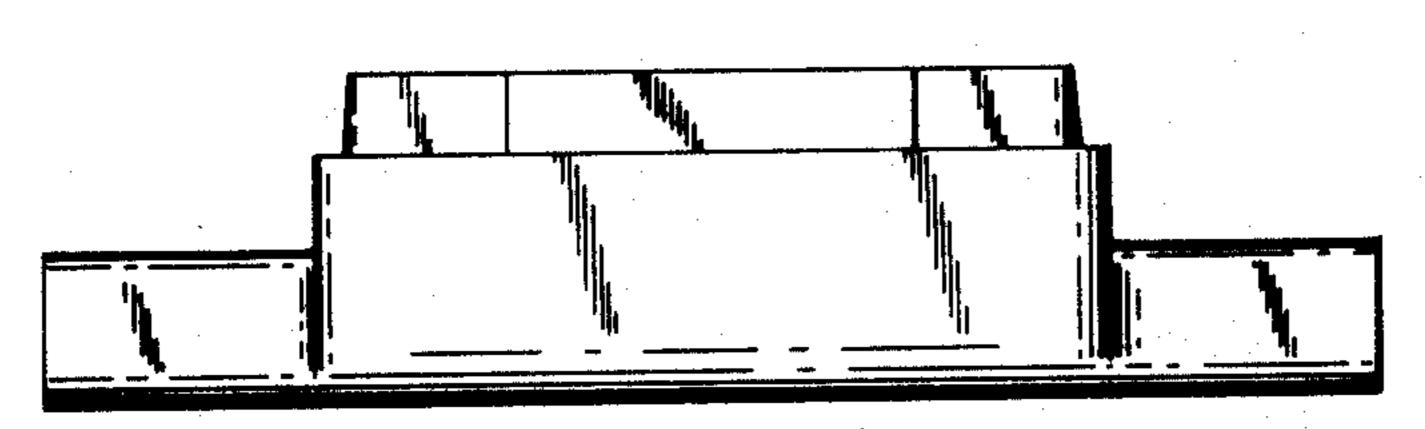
is a top view thereof on an enlarged scale; FIG. 3 is a side elevation view thereof on an enlarged scale, the opposite side having the same appearance; FIG. 4 is a bottom view thereof on an enlarged scale; and
